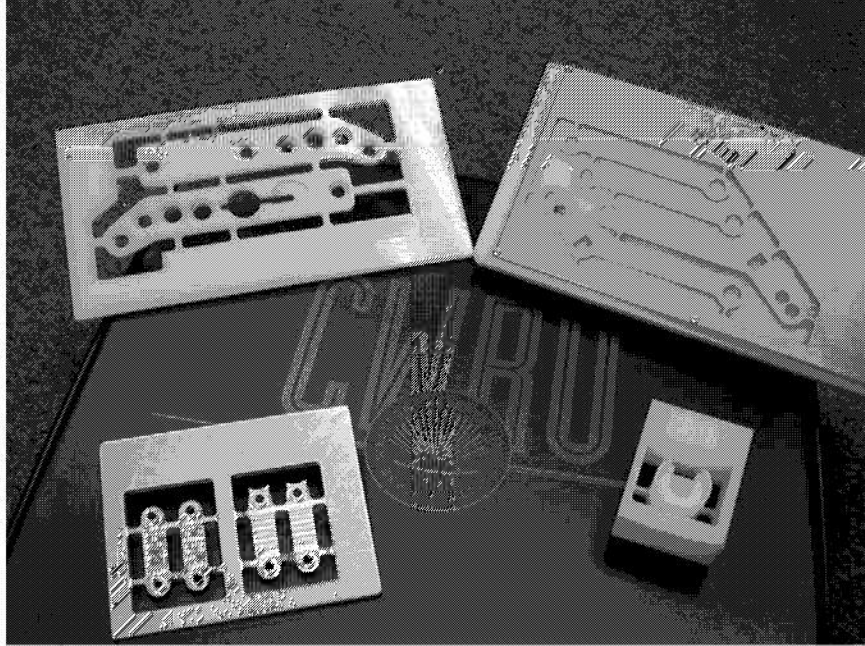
CNC machined parts for MW-4J before removal from surrounding material.
